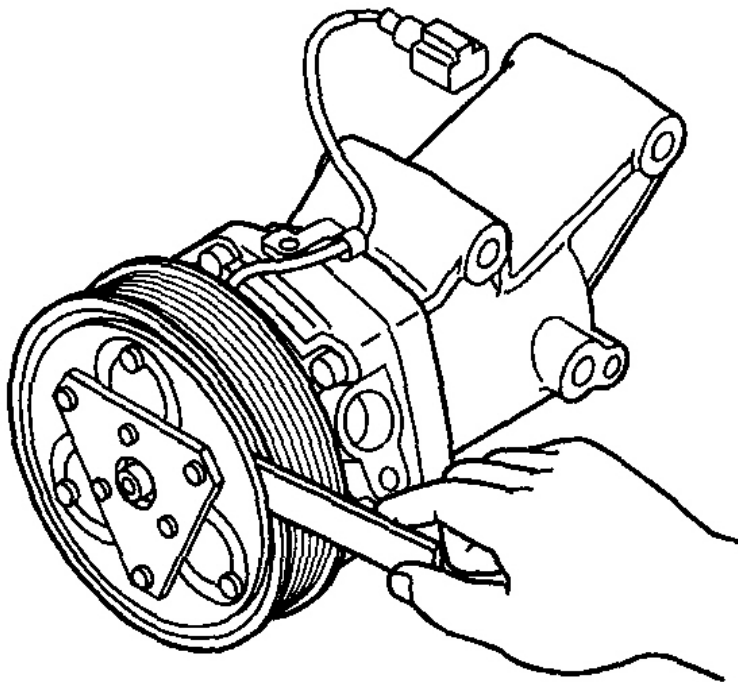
Inserting 1 MM Thick Shim Into Shaft
